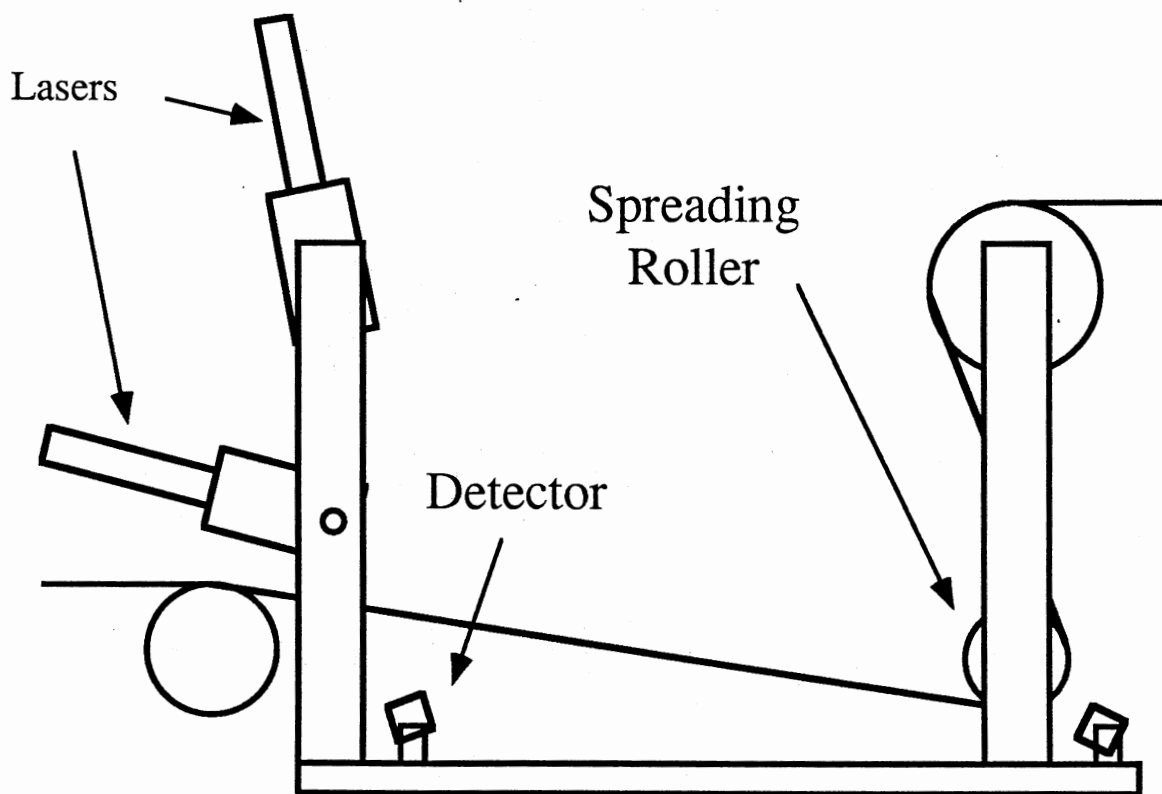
Fixture for Position Detectors, Lasers and Rollers
